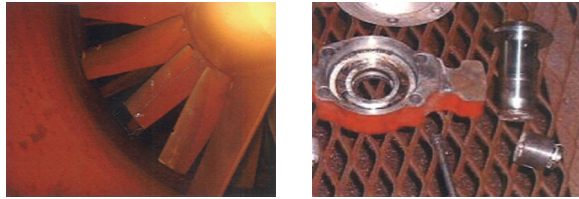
Operation troubles occurred at (a) blade and (b) blade fixing shaft of sintering cooler fan
